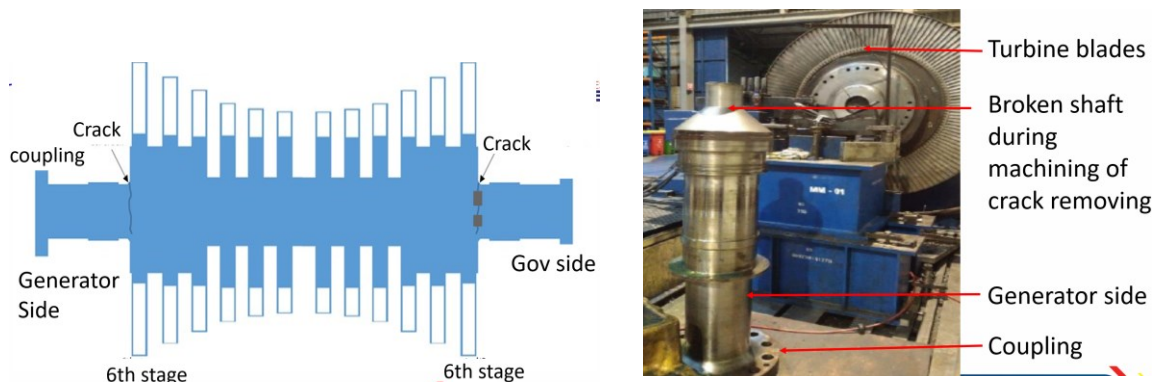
Rotor crack both at end side of 6<sup>th</sup> blades, both in generator side and governor side. Right picture is a broken shaft after machining to remove crack.
